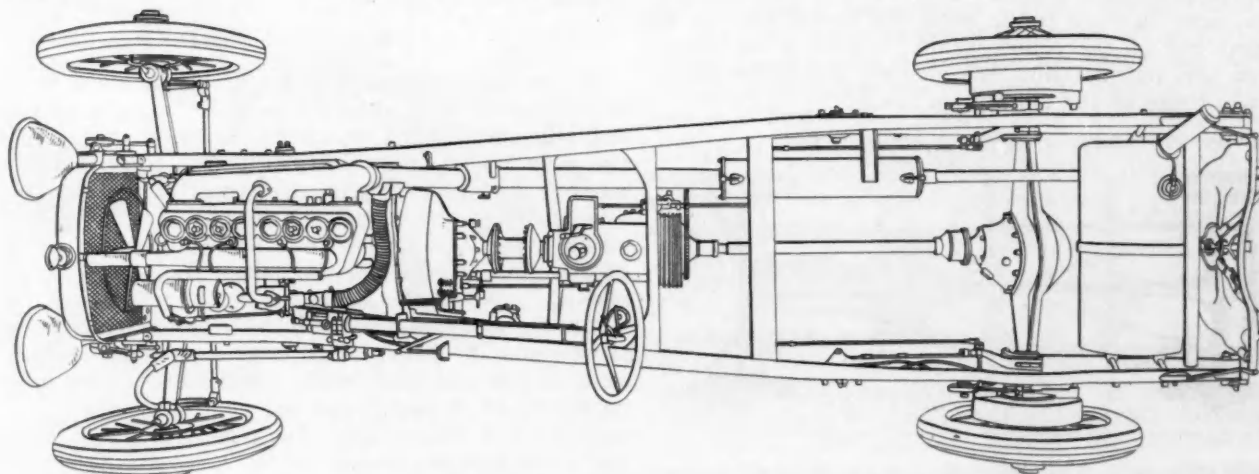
A PASSENGER CAR CHASSIS HAVING A VERY SIMPLE BRAKE LAYOUT IN WHICH THE BRAKE CAMSHAFT PASSES THROUGH THE TRANSMISSION HOUSING AND OPERATES AN INTERNAL CAM ON THE BRAKE BACK OF THE TRANSMISSION
